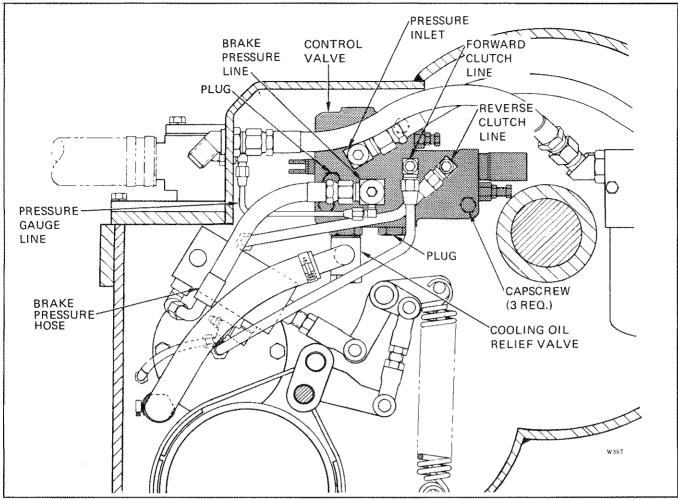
CONTROL VALVE REMOVAL, POWER CONTROLLED WINCH (Sheet 1 of 2)
